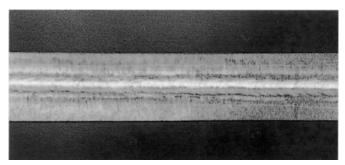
An "uranami" bead, or the penetration bead protruded on the reverse side of the groove
